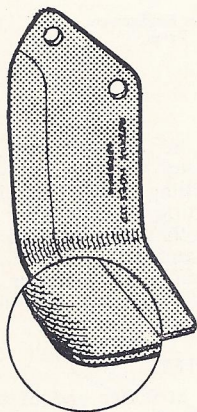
Enlarged view of blade with cutting edge turned inwards.
